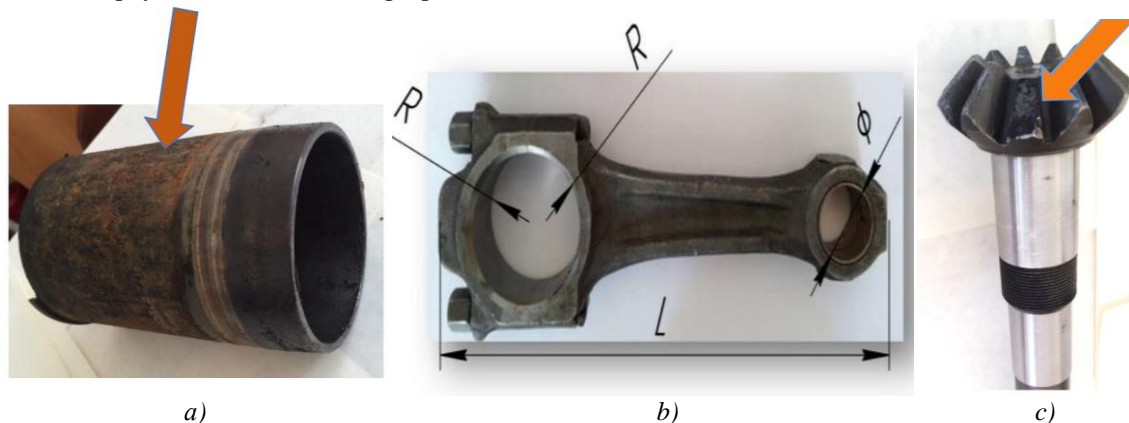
The main defects of the parts: a) defects associated with changes in the physical and mechanical properties of the material parts; b) defects associated with the mismatch of the geometric dimensions of the parts; c) defects associated with the violation of the integrity of the material of the parts.
